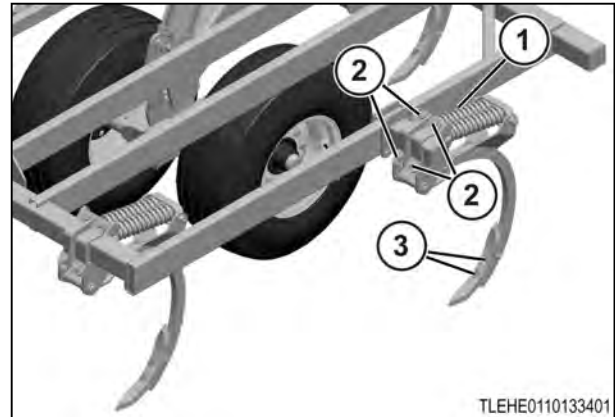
454 kg (1000 lb) compression spring edge-on shank
